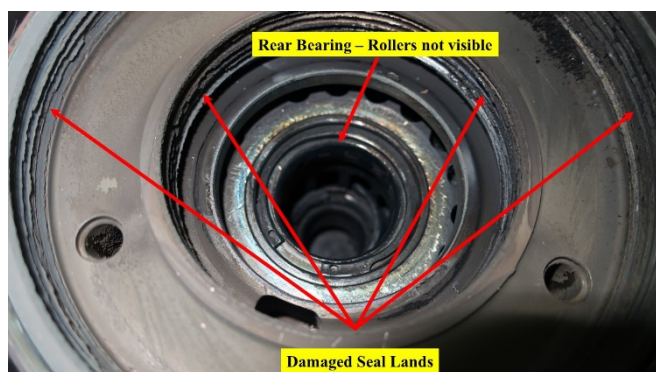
NO. 2 ENGINE REAR BEARING DAMAGE – NO COKE BUILD UP NOTED
